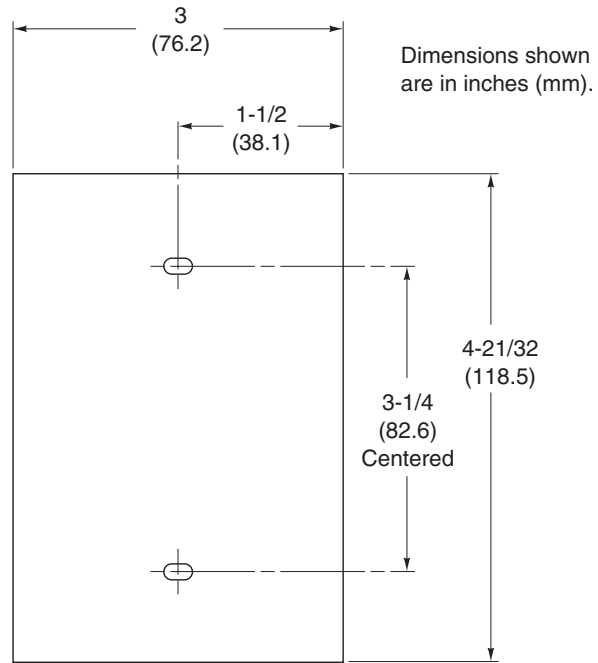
Mounting Dimensions for Direct-wall, 2 x 4 Electrical Box, and Surface Box Mounting.
